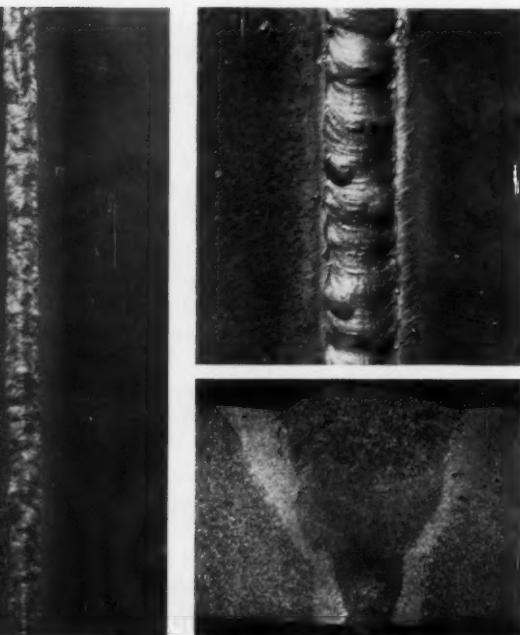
(Left) Surface View of a Vertical Fillet Weld in $1/16$ -In. Steel Sheet Made by Dip-Transfer Technique. Weld was made with 0.035-in. diameter electrode fed at 120 in. per min., CO_2 shield, at 60 amp., 20 v.
